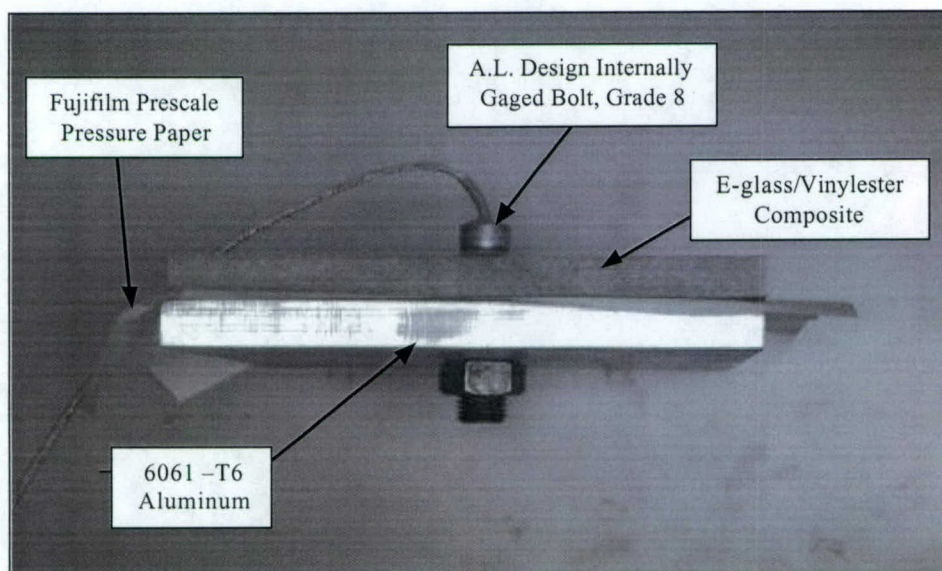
Single Bolt Hybrid Connection Fixture
